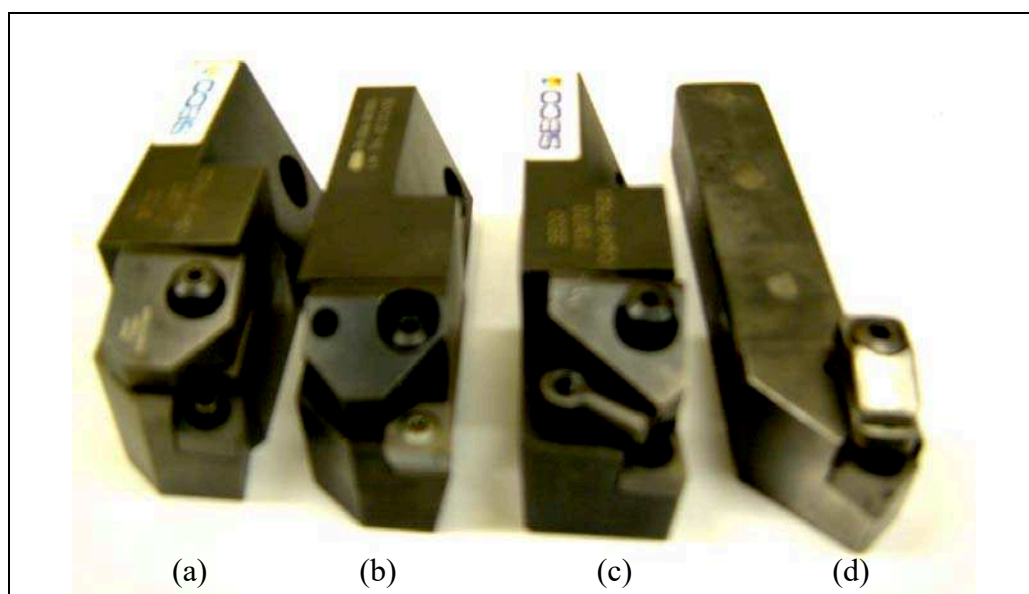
Tool holders used in the machining trials: (a) designation PCLNR2525-M12 used for carbide tools (T1,T2,T3,T4); (b) designation SCLCR2525-M12 used for PCD tools (T5,T6); (c) designation DCLNR2525-M12 used for CBN/PCBN and ceramic tools (T7,T8, T9 and T10); (d) designation MSLNR-252512 used for square tools: micron-grain and nano-grain size ceramics (T11,T12,T13).
